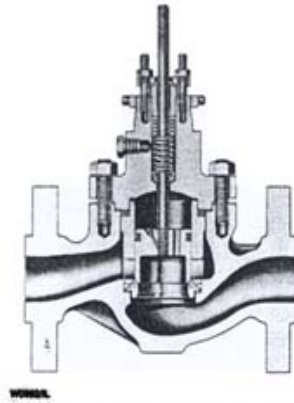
Valve Body with Cage-Style Trim, Balanced Valve Plug, and Soft Seat
